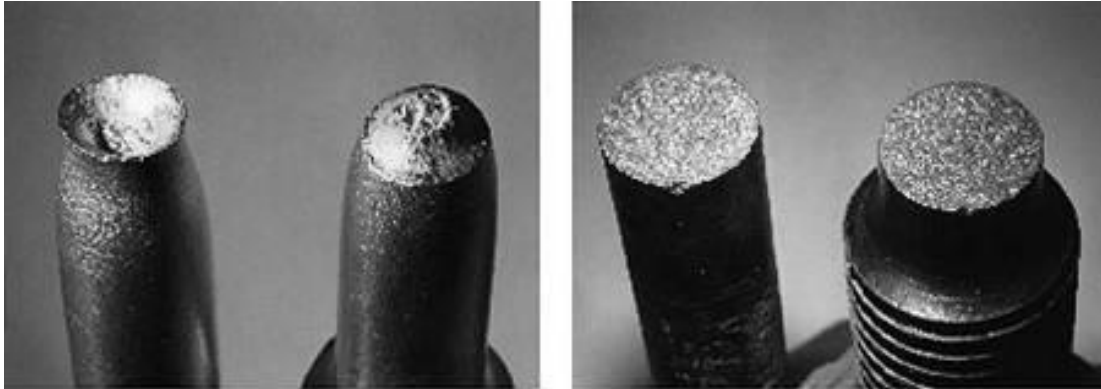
Left: ductile fracture surface of Al; Right: brittle fracture in mild steel [3]
